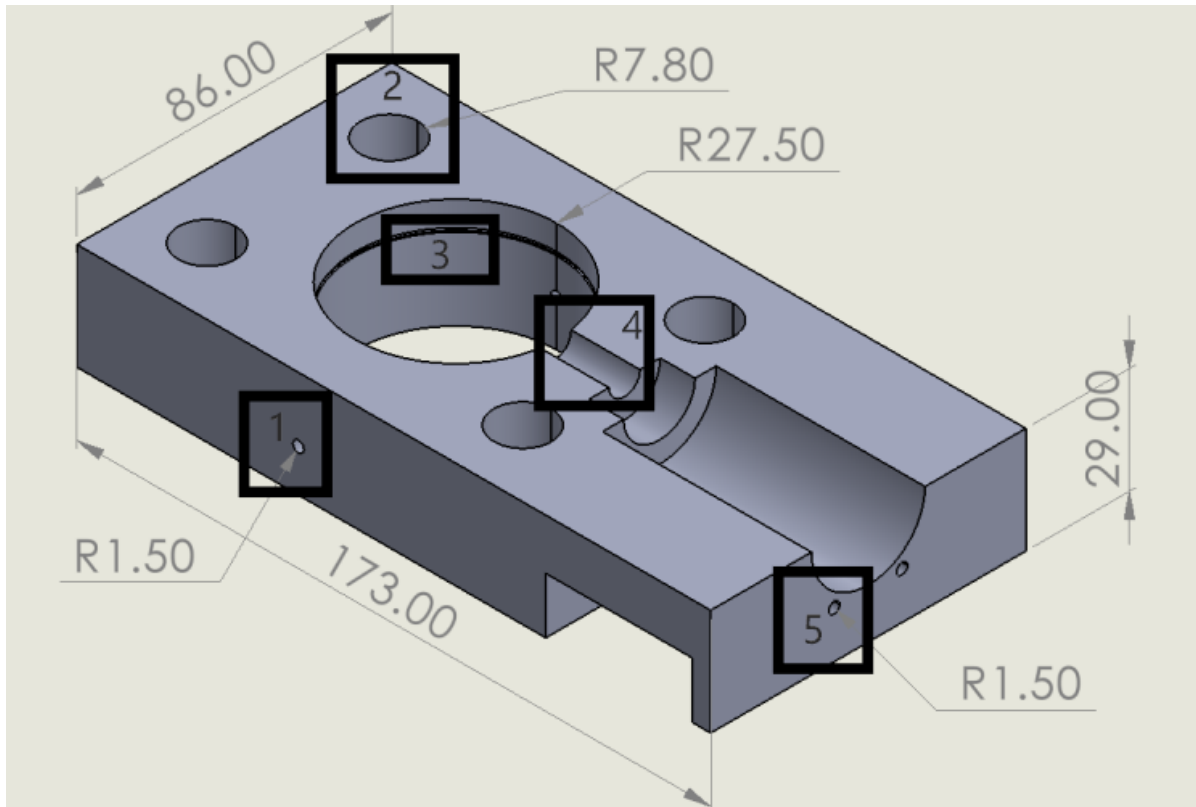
Half-sliced CAD model of actuator mount (all dimensions are in mm)
